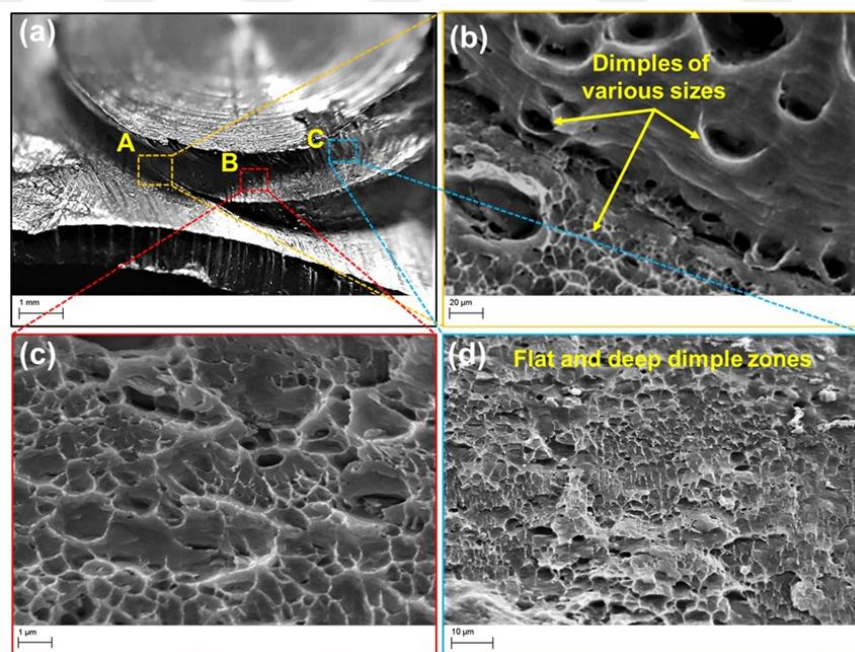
displays the nugget zone of the Al 2024-O to the Al6061-O welds and the fracture region at the top side of the lower sheet [129]. The failure mode appears to be of the sheet tearing-nugget pull out type, as related to better mixing between the boundaries of the materials under stirring [135]
